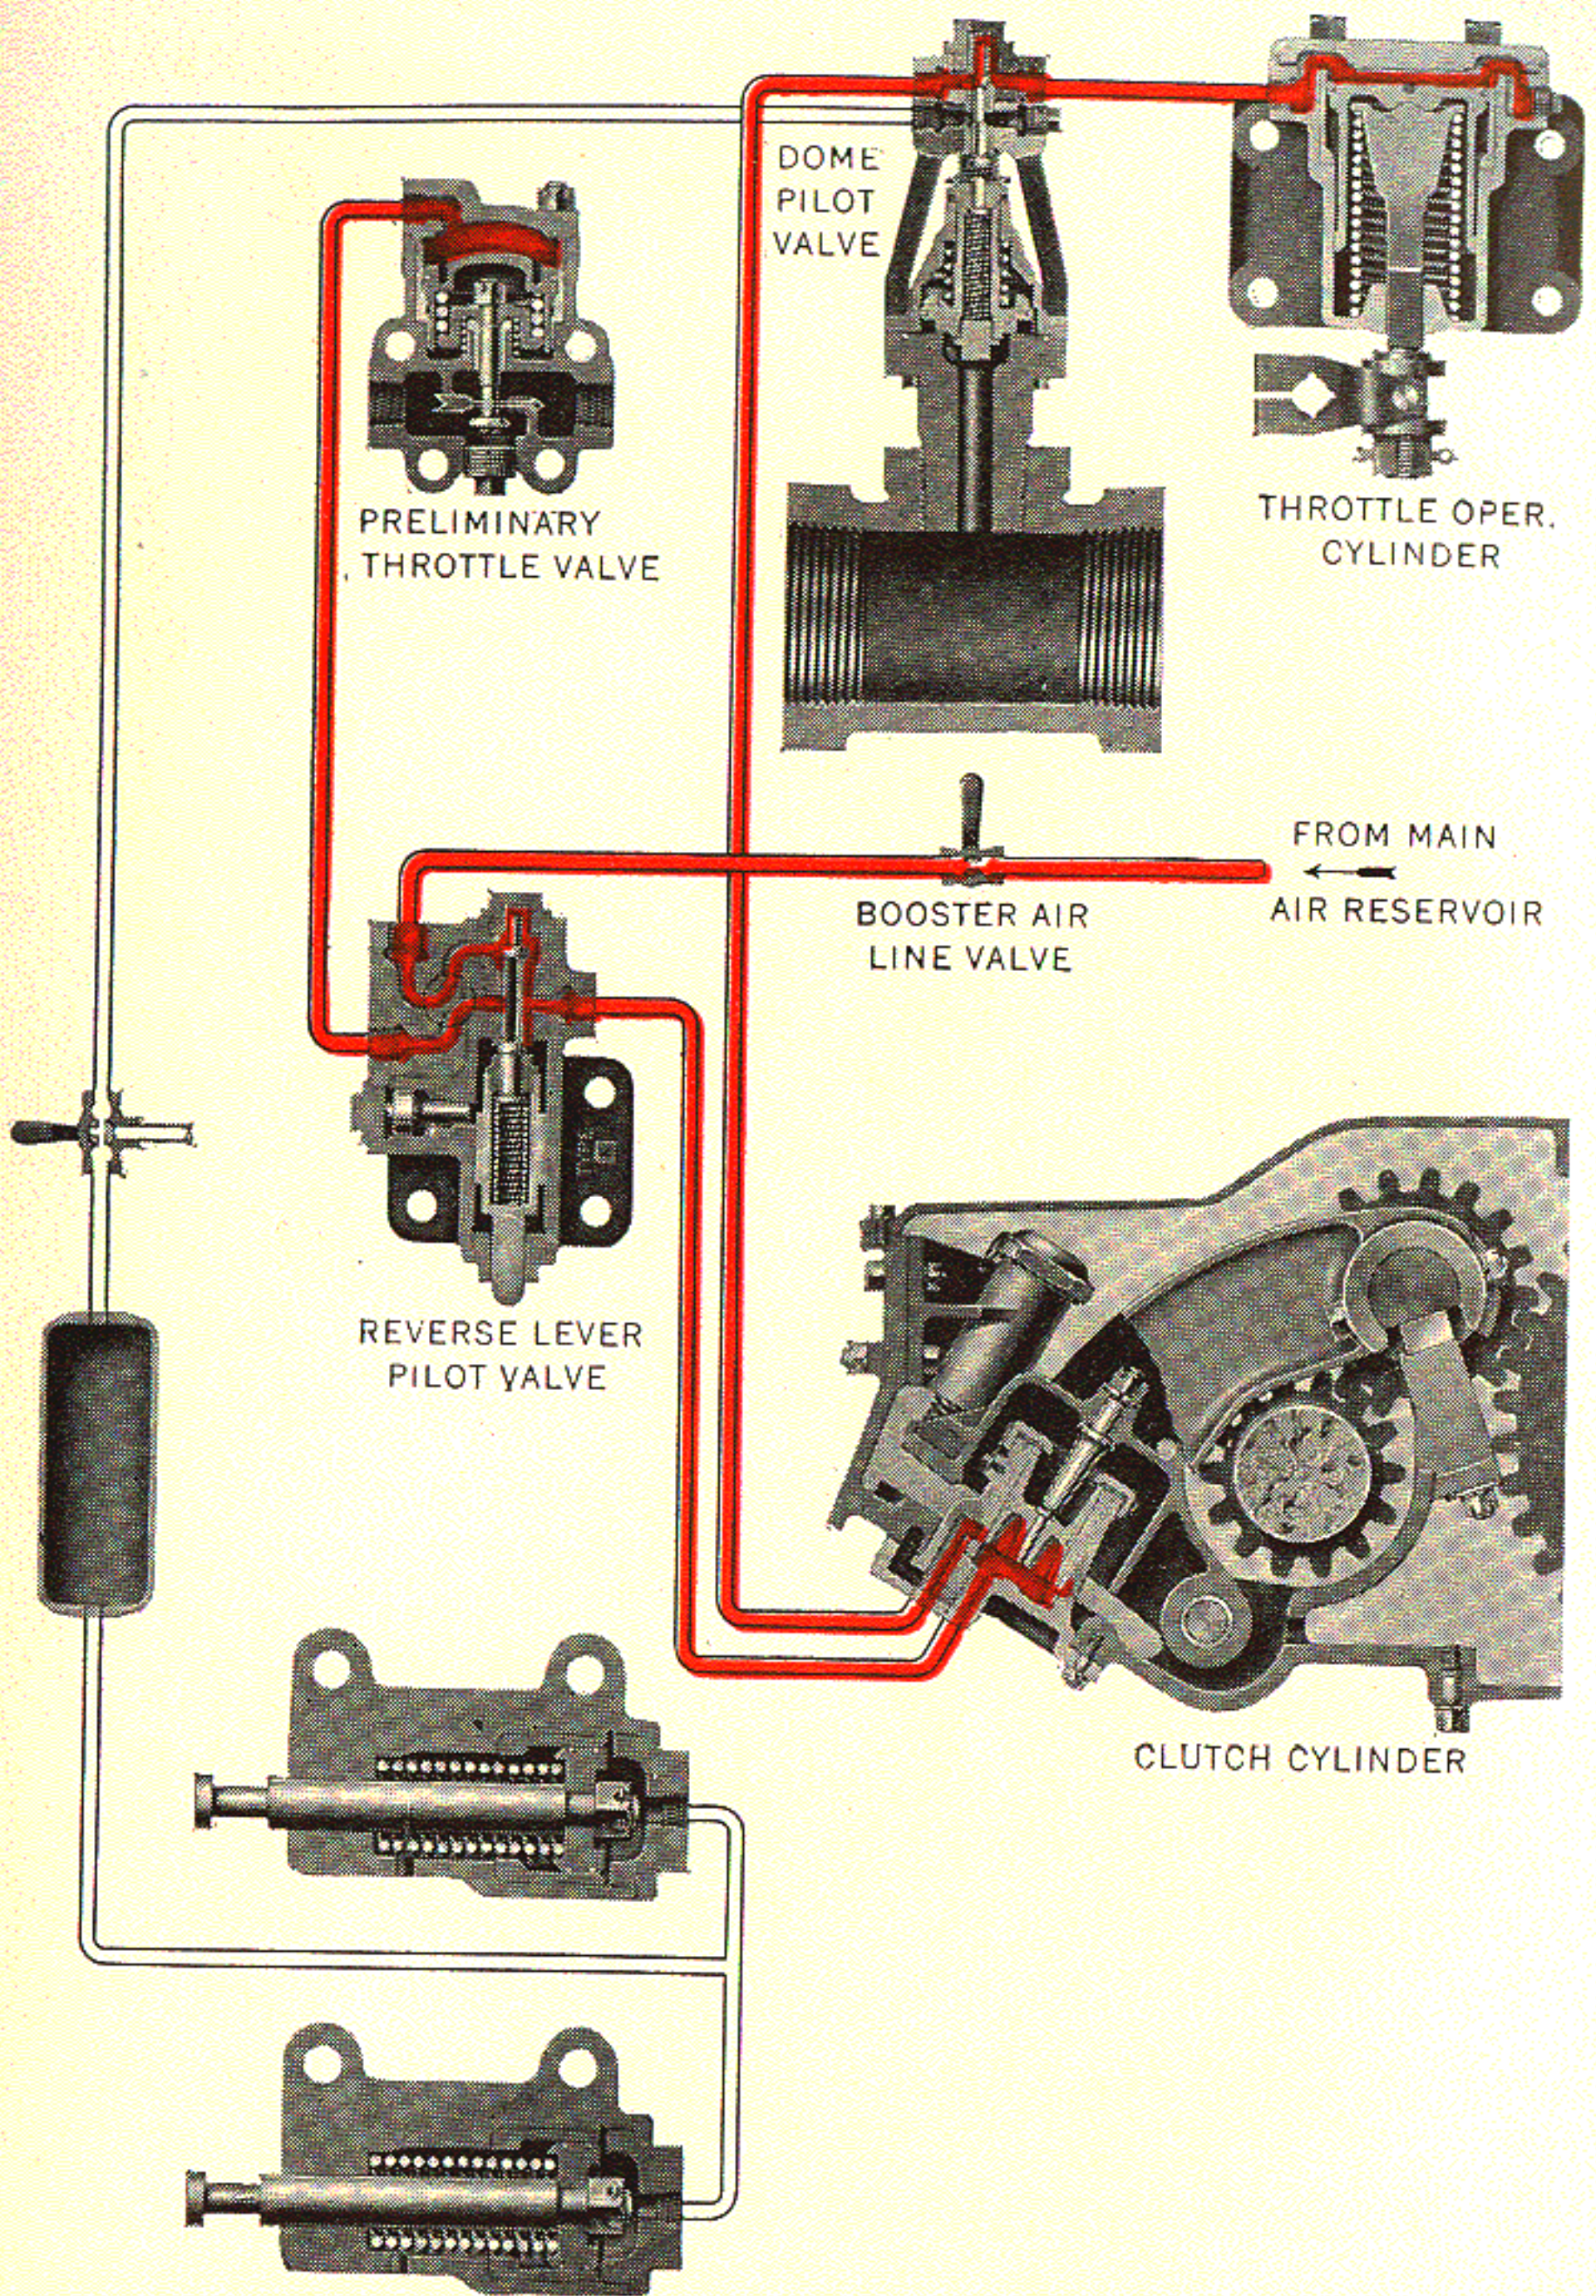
Preliminary Throttle Valve and Clutch Cylinder Have Operated. Air Has Reached Throttle Operating Cylinder
